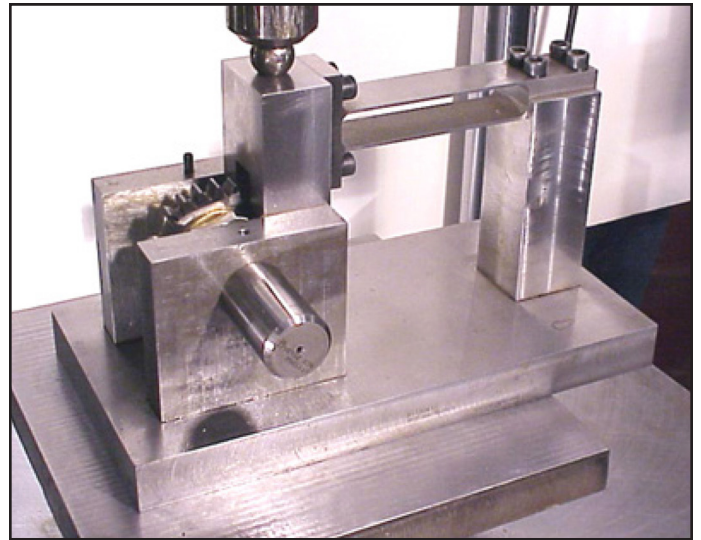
Single Tooth Bending Fatigue Test Fixture.
